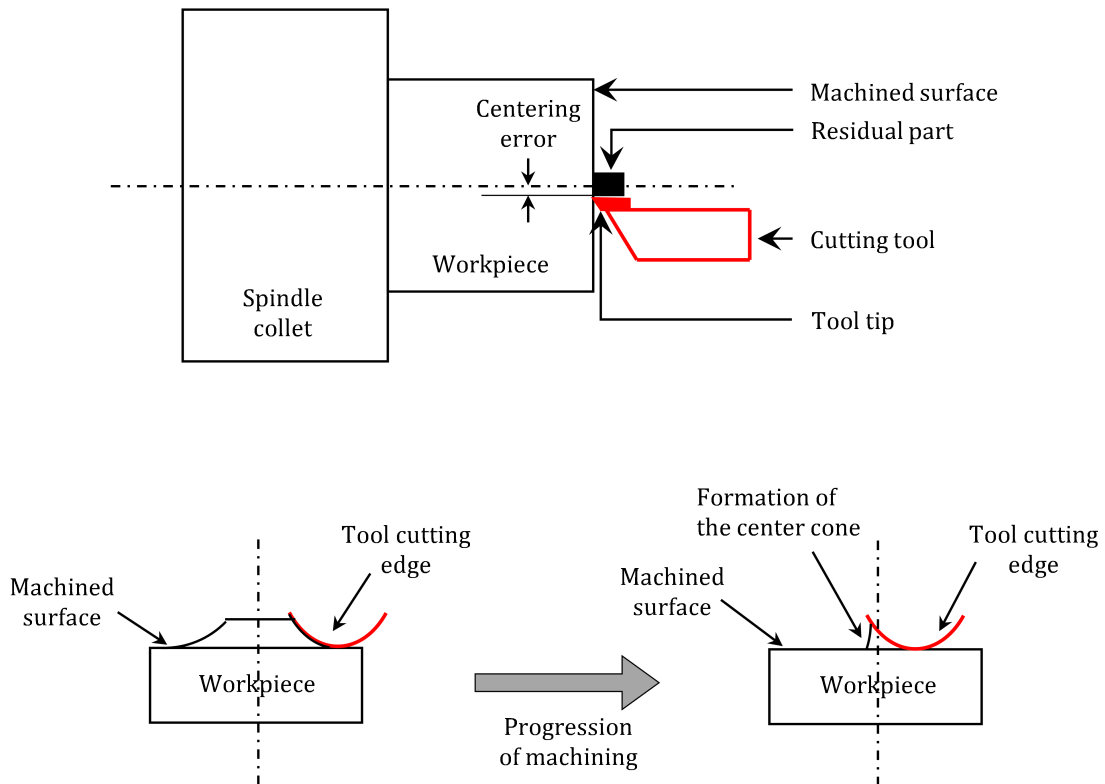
Mechanism of forming the center cone at the workpiece center due to workpiece centering error
